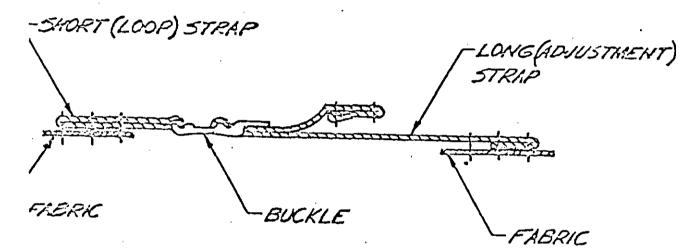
HOOD, EXTREME COLD WEATHER, IMPERMEABLE (TYPE II)
